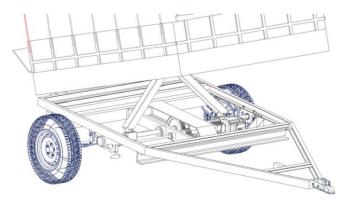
3D model of the trailer with screw lifting mechanism.
